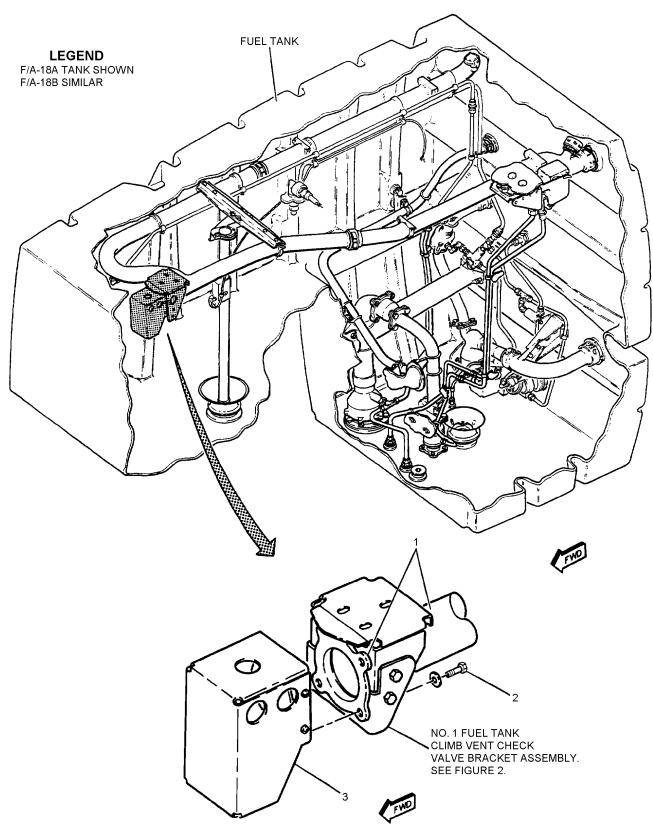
No. 1 Fuel Tank Climb Vent Check Valve (5VAP531) (Sheet 1)
